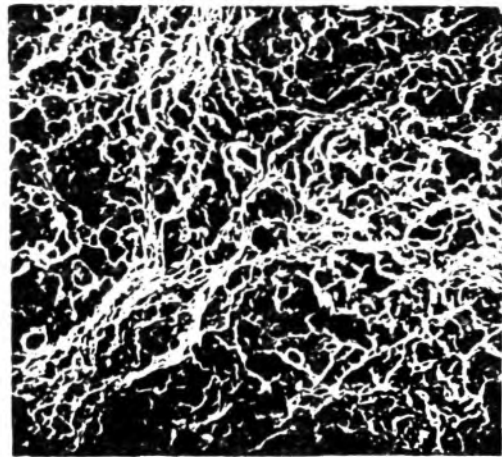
Scanning electron fractograph of fusion zone tensile sample after 850°C post-weld heat treatment (320X)
